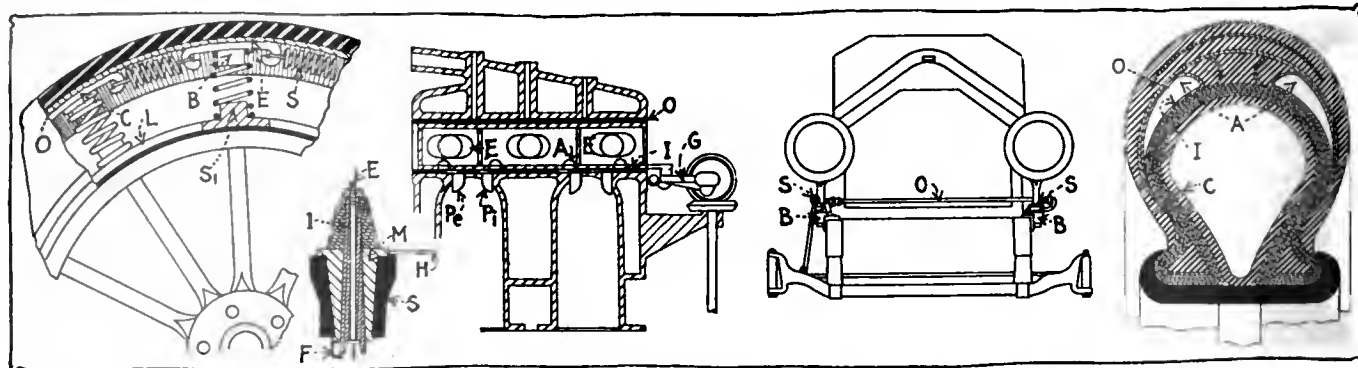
Casey spring tire. Fig. 2—Blake spark-plug. Fig. 3—Adams motor valve. Fig. 4—Krimmel movable headlight support. Fig. 5—Stewart & Harlan tire construction
